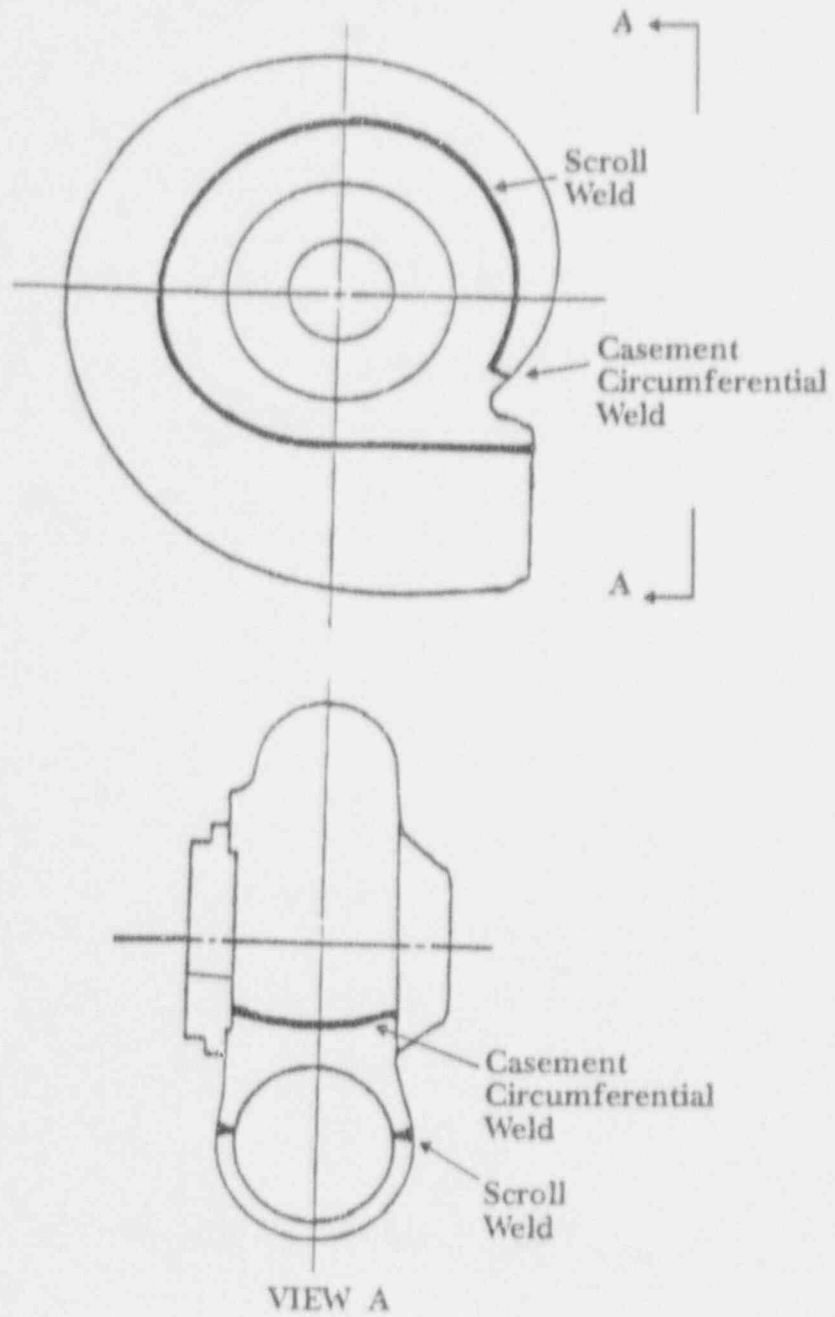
Schematic Drawing Showing Pump Casing Welds for ANO-1 Reactor Coolant Pump
